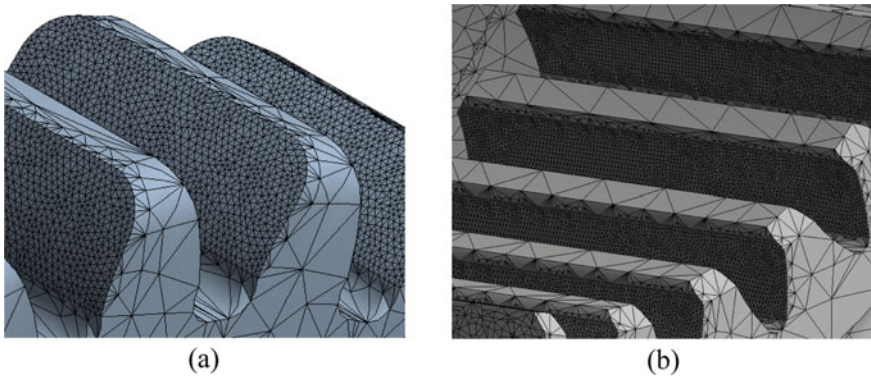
Finite-element meshing of the tip (a) and shaft (b) surfaces
